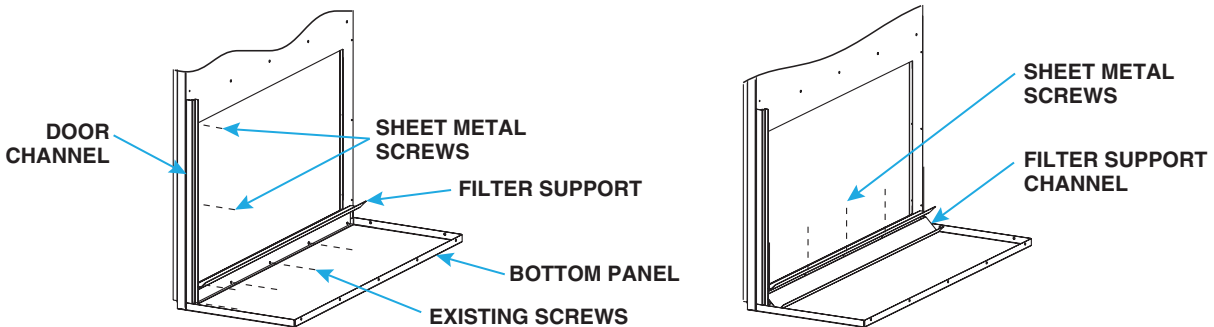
Install Door Channel, Bottom Panel, Filter Support, and Filter Support Channel
